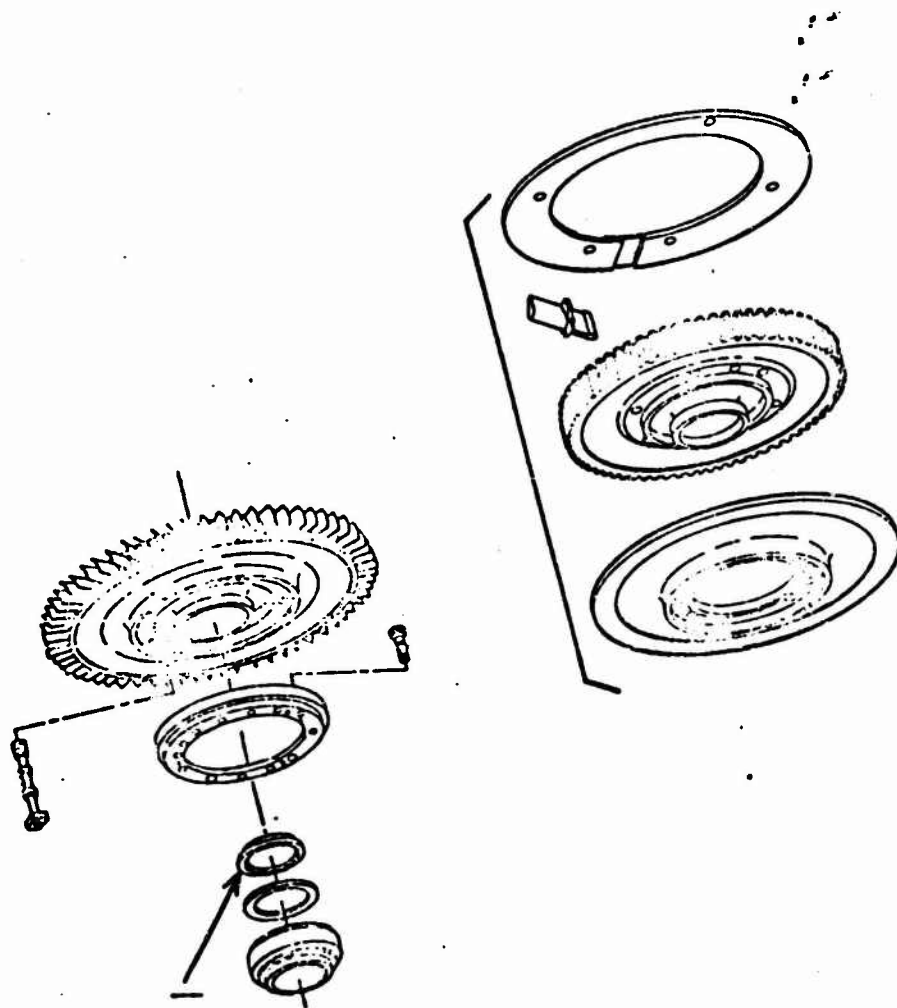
Rotor Assemblies, Gas Producer Nozzle and Cylinder
